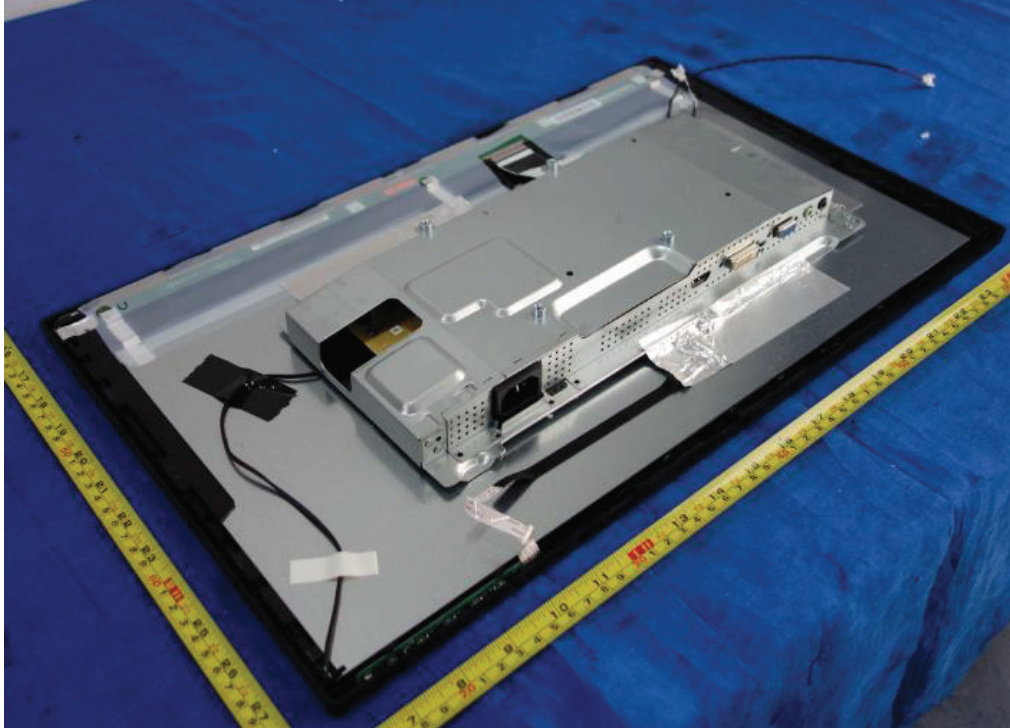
Metal enclosure type B with power board 715G7300 and main board 715G9494
